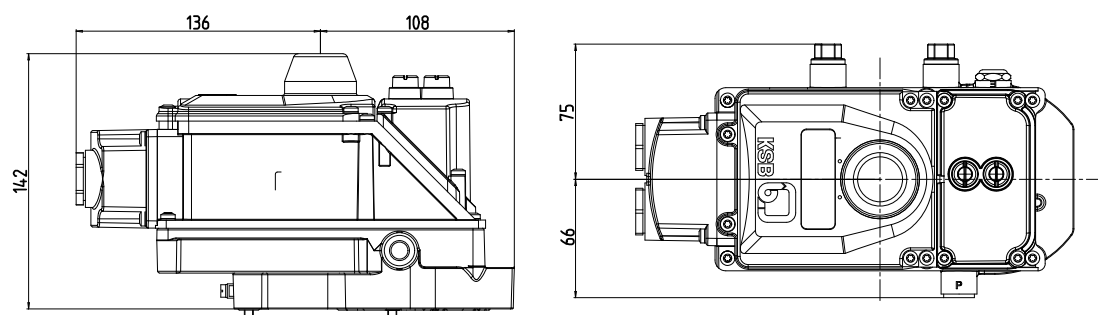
Dimensions of AMTRONIC U / types A1300 and A1301
